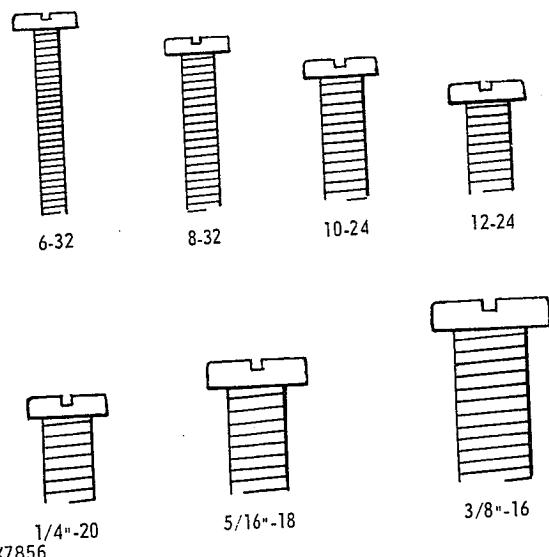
Inch-size Machine Screw Sizes and Threads Per Inch — Actual Size
